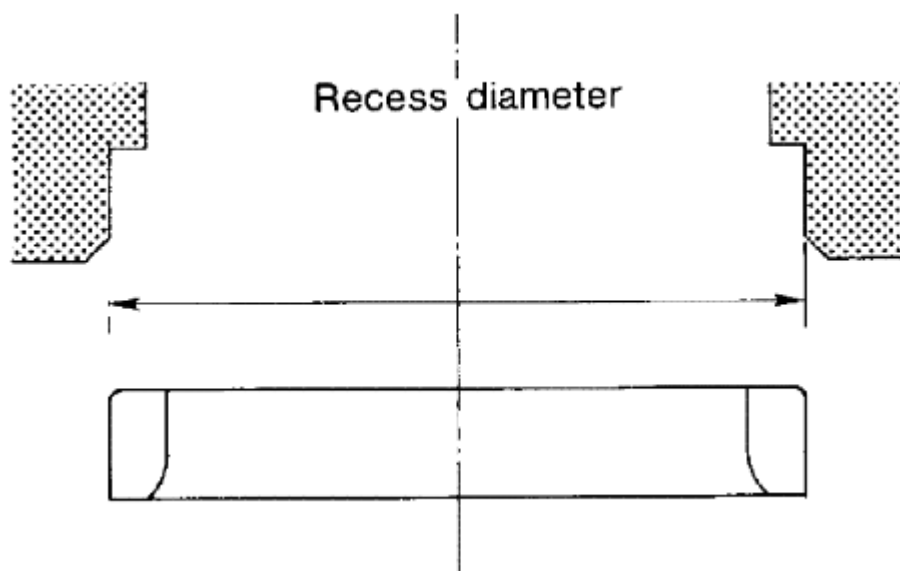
Reaming Cylinder Head Recess Diameter For Service Valve Seat
